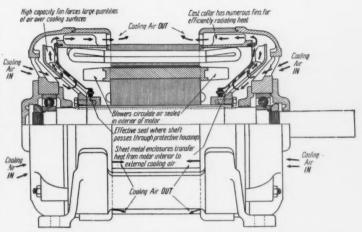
Sectional view of totally-enclosed fan-cooled motor
